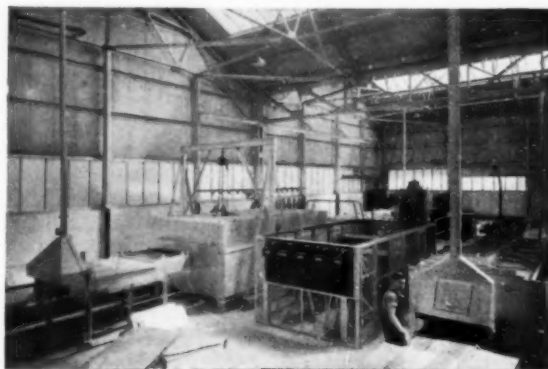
Continuous belt-conveyor type equipment for annealing non-ferrous sheets up to 4 ft. 6 in. in width.
